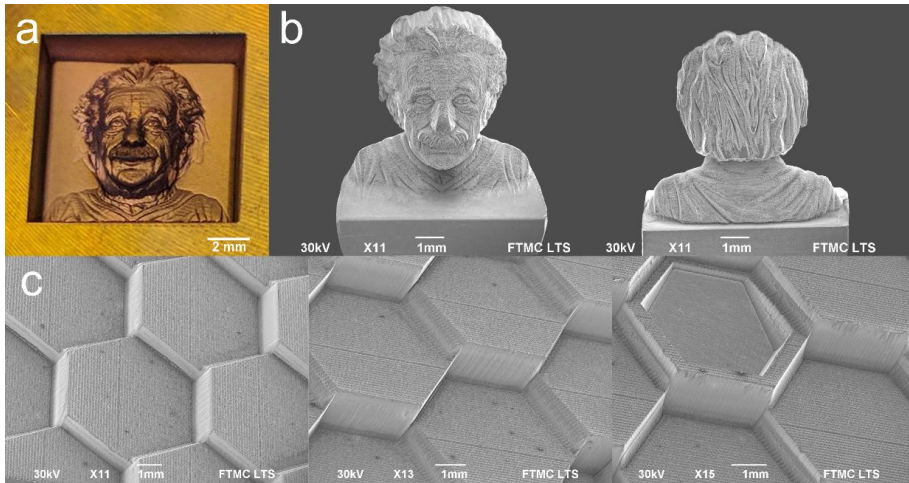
Examples of 3D laser fabrication. (a) Photo of front part of Albert Einstein's bust engraved into copper dimensions $10 \times 10 \times 2 \text{ mm}^3$. (b) SEM images of both-sided laser sculptured bust, dimensions $8 \times 8 \times 5 \text{ mm}^3$ (without pedestal). (c) SEM photographs of fish scale-like structure for fluidic drag reduction applications. The height of scale 2.2 mm, period 6 mm. Ablation rate $6 \text{ mm}^3/\text{min}$, peak fluence $F_0 = 3.5 \text{ J/cm}^2$, pulse repetition rate $f = 1138 \text{ kHz}$, pulse duration $\tau = 10 \text{ ps}$, laser wavelength $\lambda = 1064 \text{ nm}$, laser power $P = 40 \text{ W}$.
